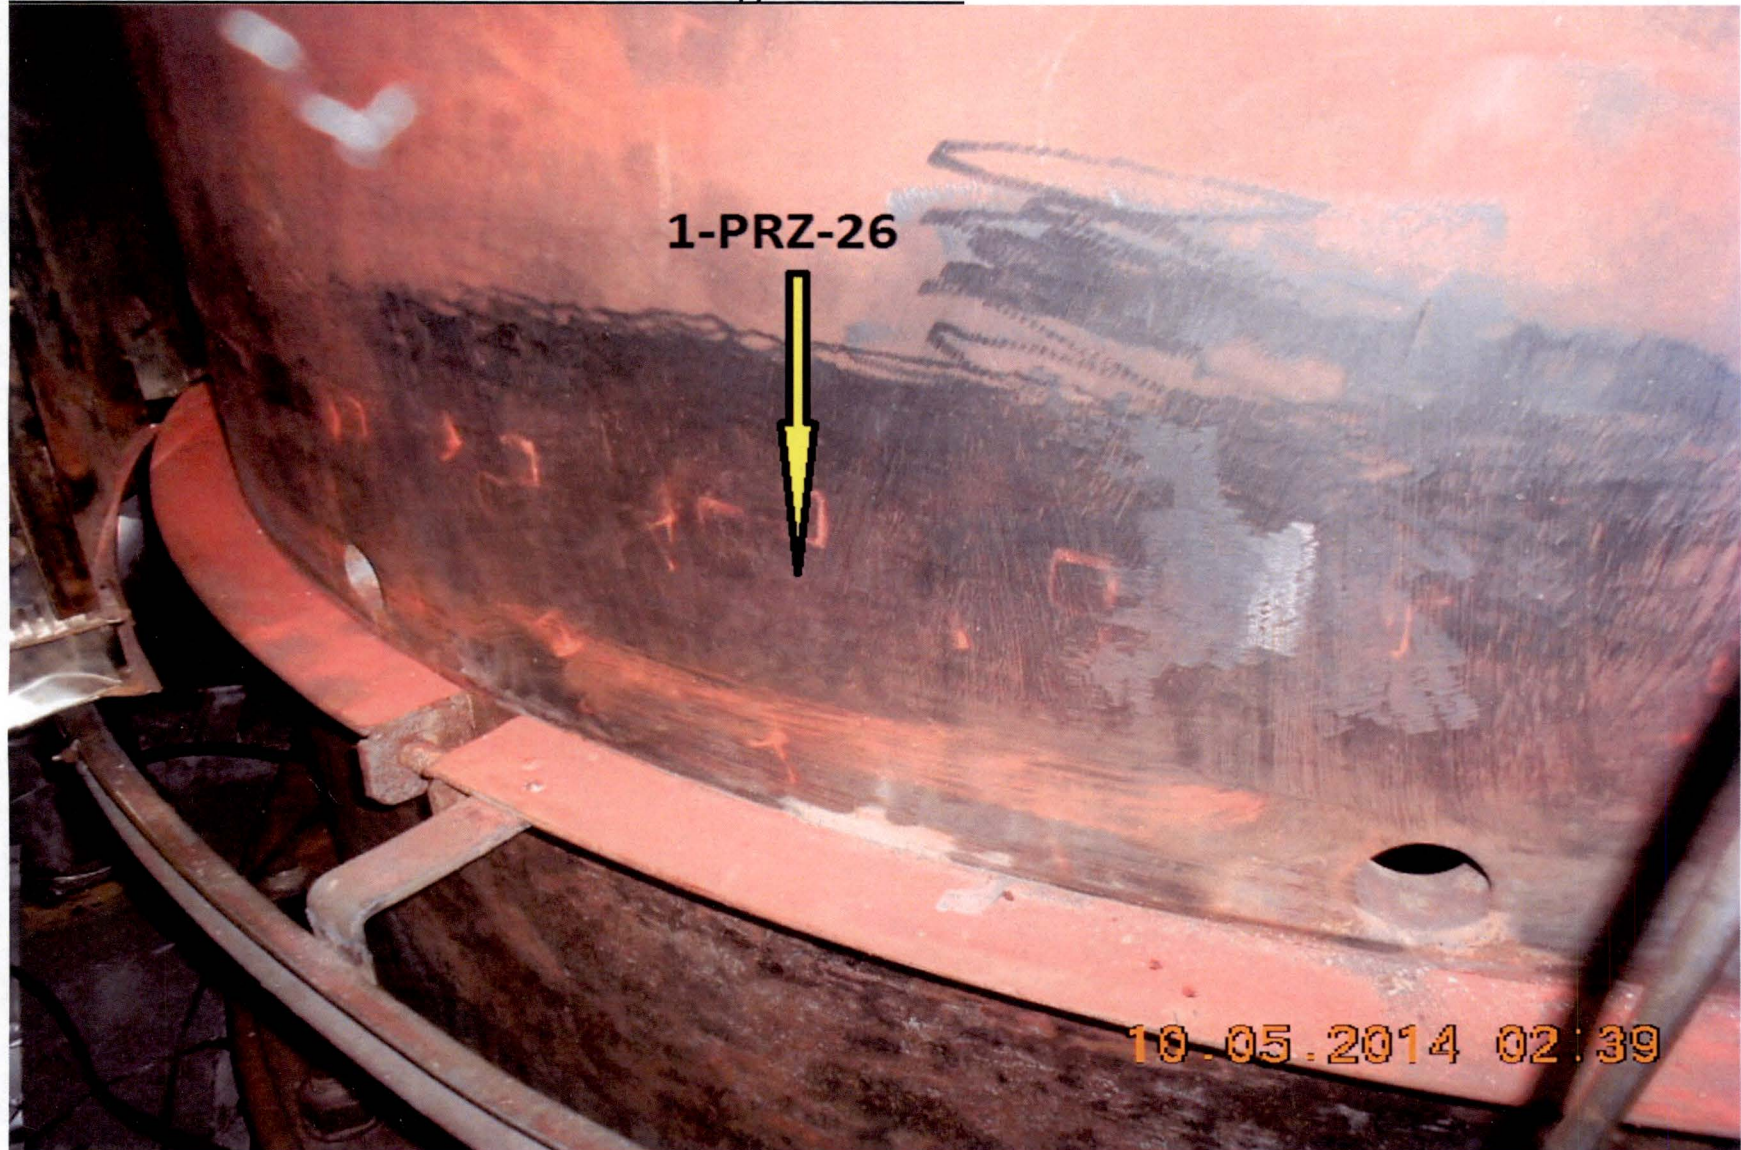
Weld 1-PRZ-26 Component Photograph
